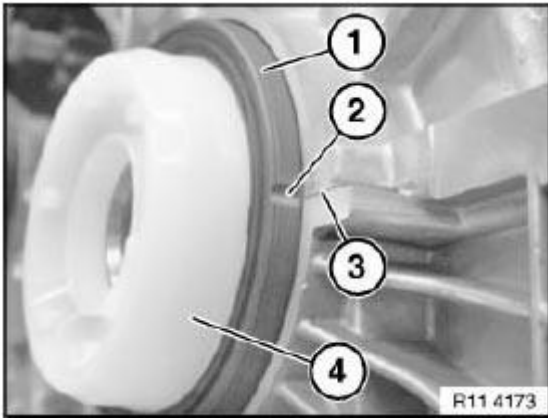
Identifying Support Sleeve, Radial Shaft Seal And Grooves
